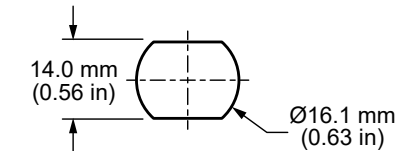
ANT-W63-SPNF1 Mounting Hole Dimensions
